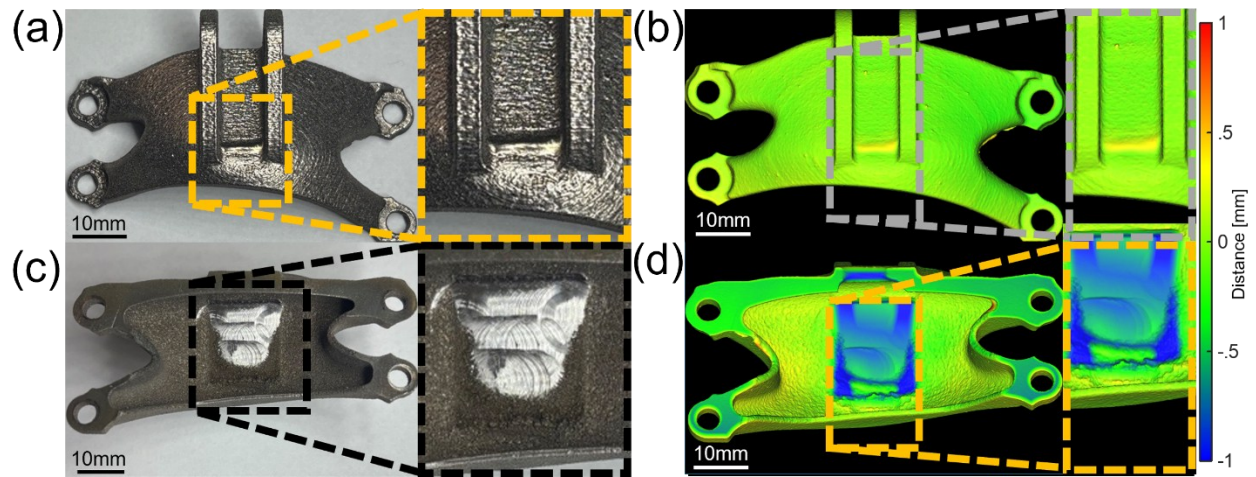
As printed and 3D-scanned partially supported uncontrolled bracket. (a) Top view of as-printed bracket. (b) Top view of 3D-scanned bracket. (c) Bottom-up view of as-printed bracket with as-machined support interface. (d) Bottom-up view of 3D-scanned bracket.
